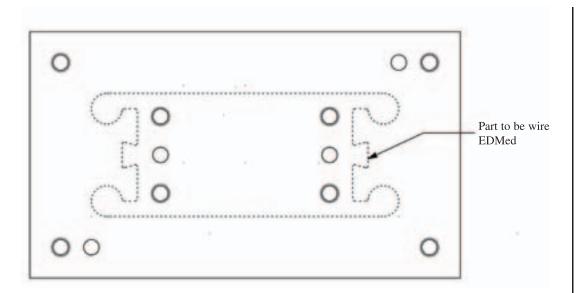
2 Part to be Wire EDMed Drill, ream and tap all desired holes.
